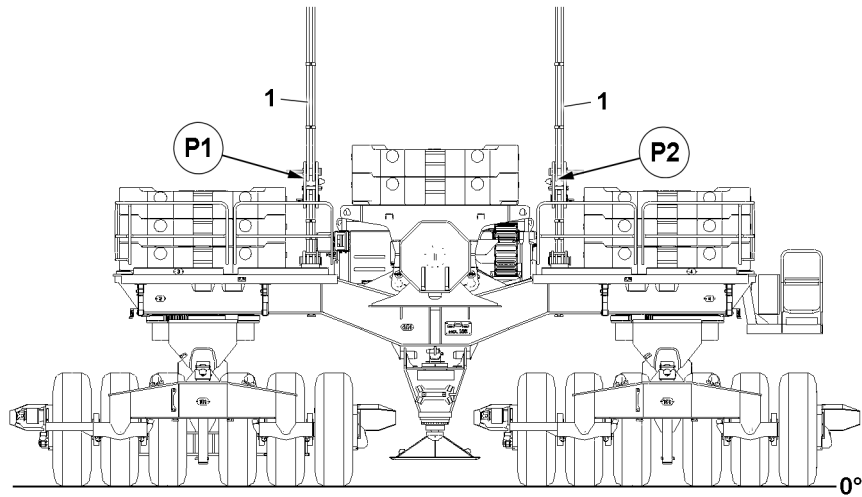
Assembling the ballast trailer guying on the ballast trailer – Pin points
